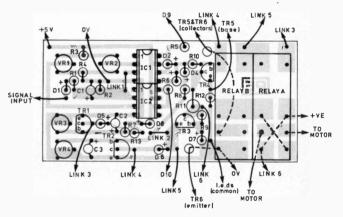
(a). Component layout. IC1 and IC2 may be plugged into a single d.i.l. socket
